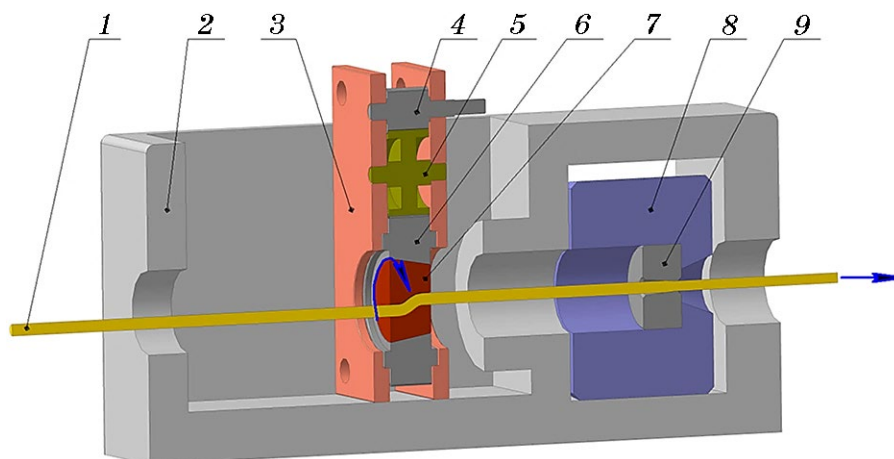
Scheme of wire deformation combined process: wire (1), drawing block (2), bed (3), drive gear (4), intermediate gear (5), bandage (6), equal-channel stepped die (7), die stand (8), die hole (9).
